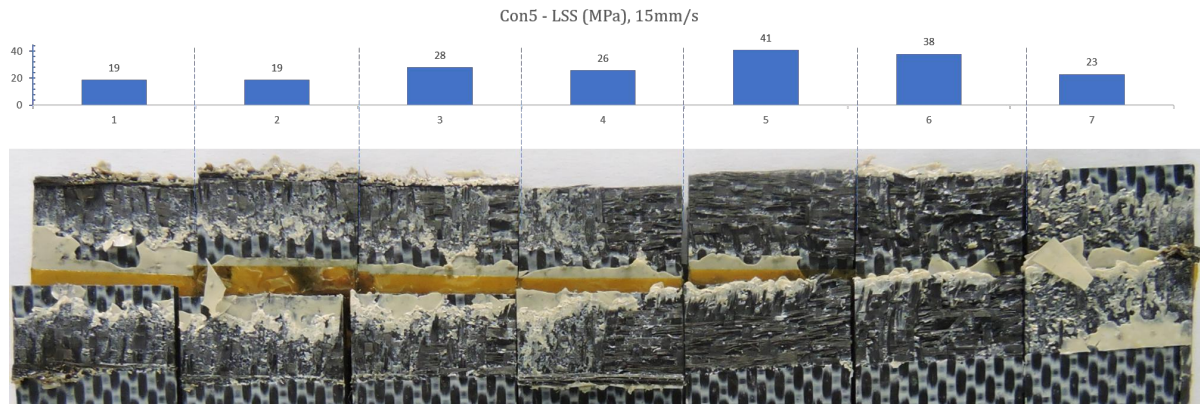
The fracture surfaces at a welding speed of 15mm/s
